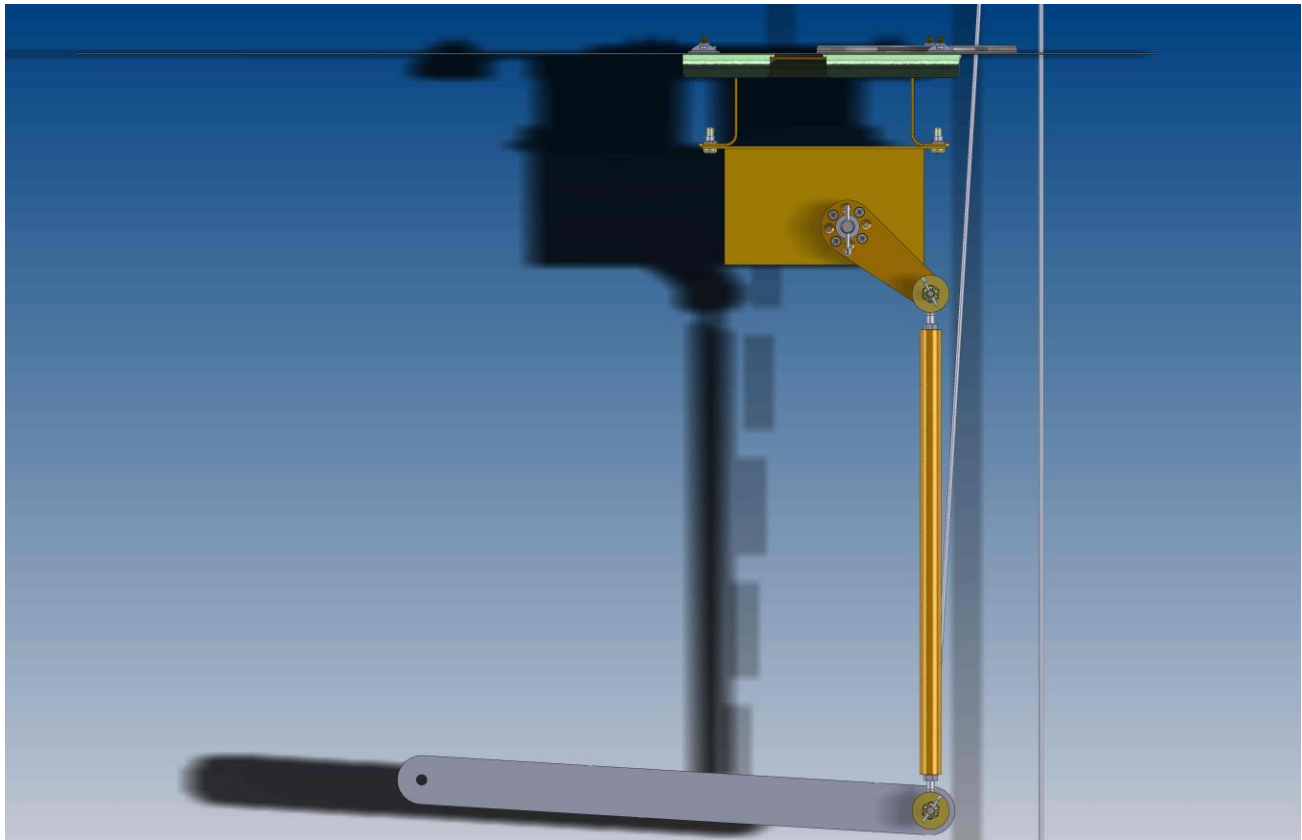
RETRACTABLE GEAR AIRCRAFT ROLL SERVO TOP VIEW
